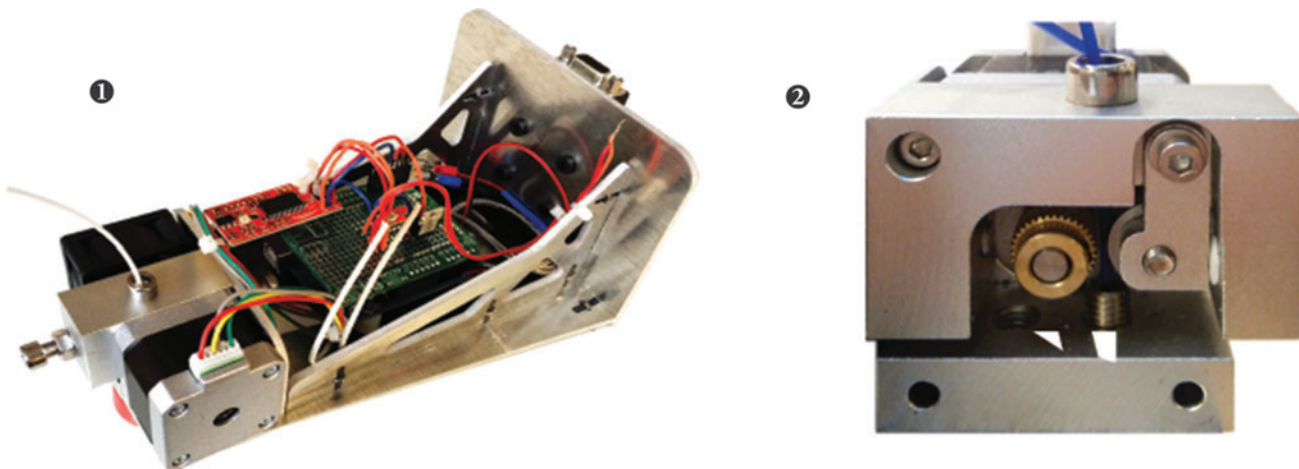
Components of custom FDM printing module. (1) Custom FDM printing module; and (2) extruder head powered by Signstek stepper motor.
